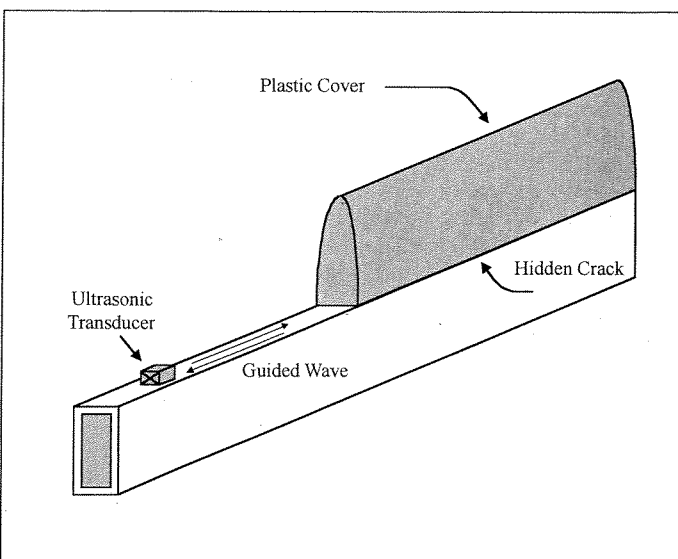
Proposed guided wave testing technique for transverse cracking in a helicopter blade.
